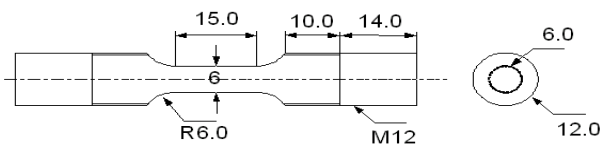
Dimensions of tensile specimen used in this study(mm)
